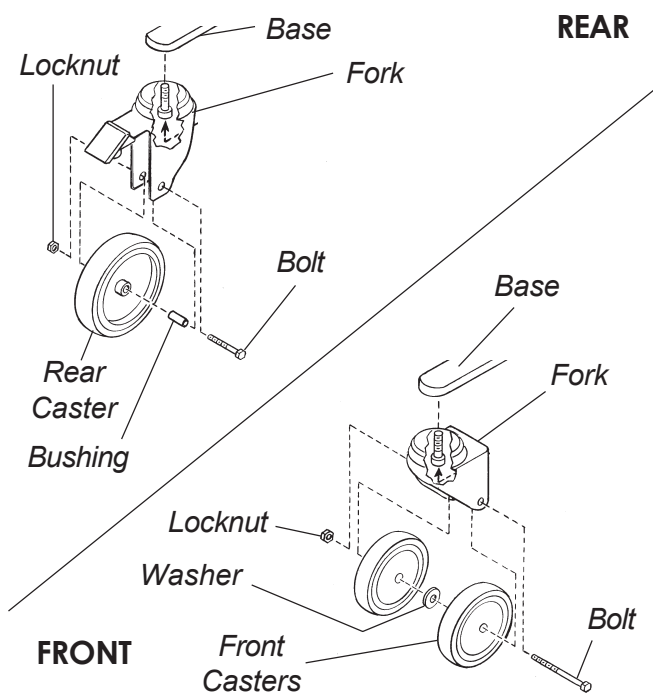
REPLACING CASTERS AND/OR FORKS
